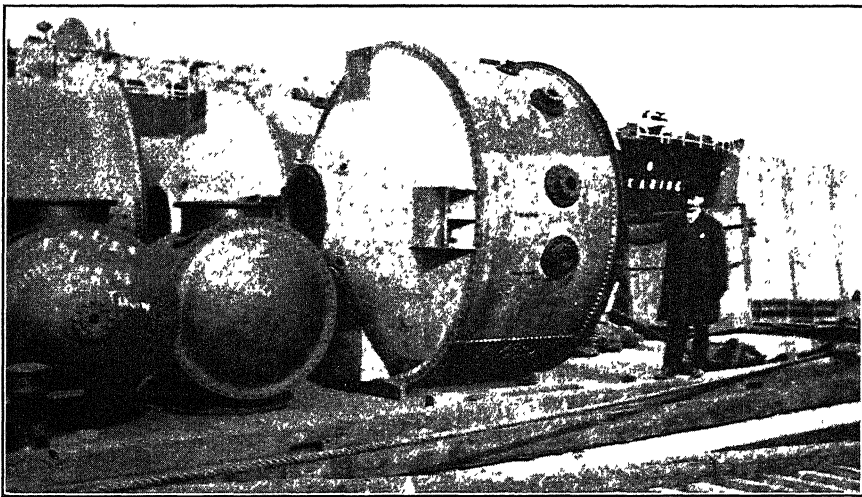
Lower section of a vacuum pan for export to Formosa, 11 ft diam. \times 8 ft. 6 in. long, with calandria inside, gross weight 19,400 lb.; shell of steel, bottom of cast iron: flanges should have been protected.
